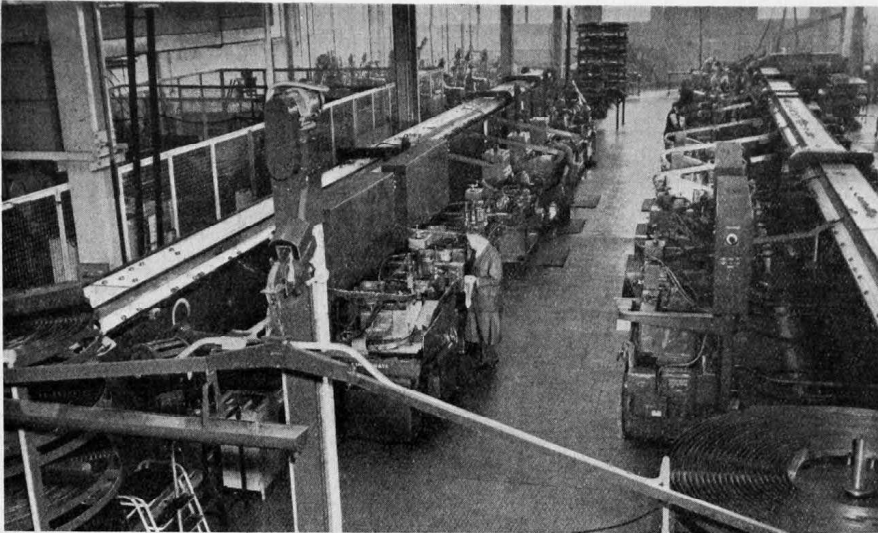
Cone grinding line with brush feeders at top end feeding on to circulating conveyors feeding the machine work chutes
